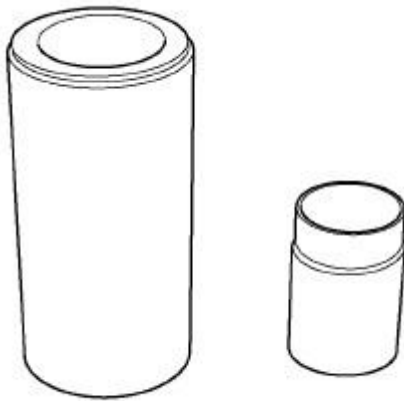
FRONT AND REAR SEAL TOOL - VM.9990
